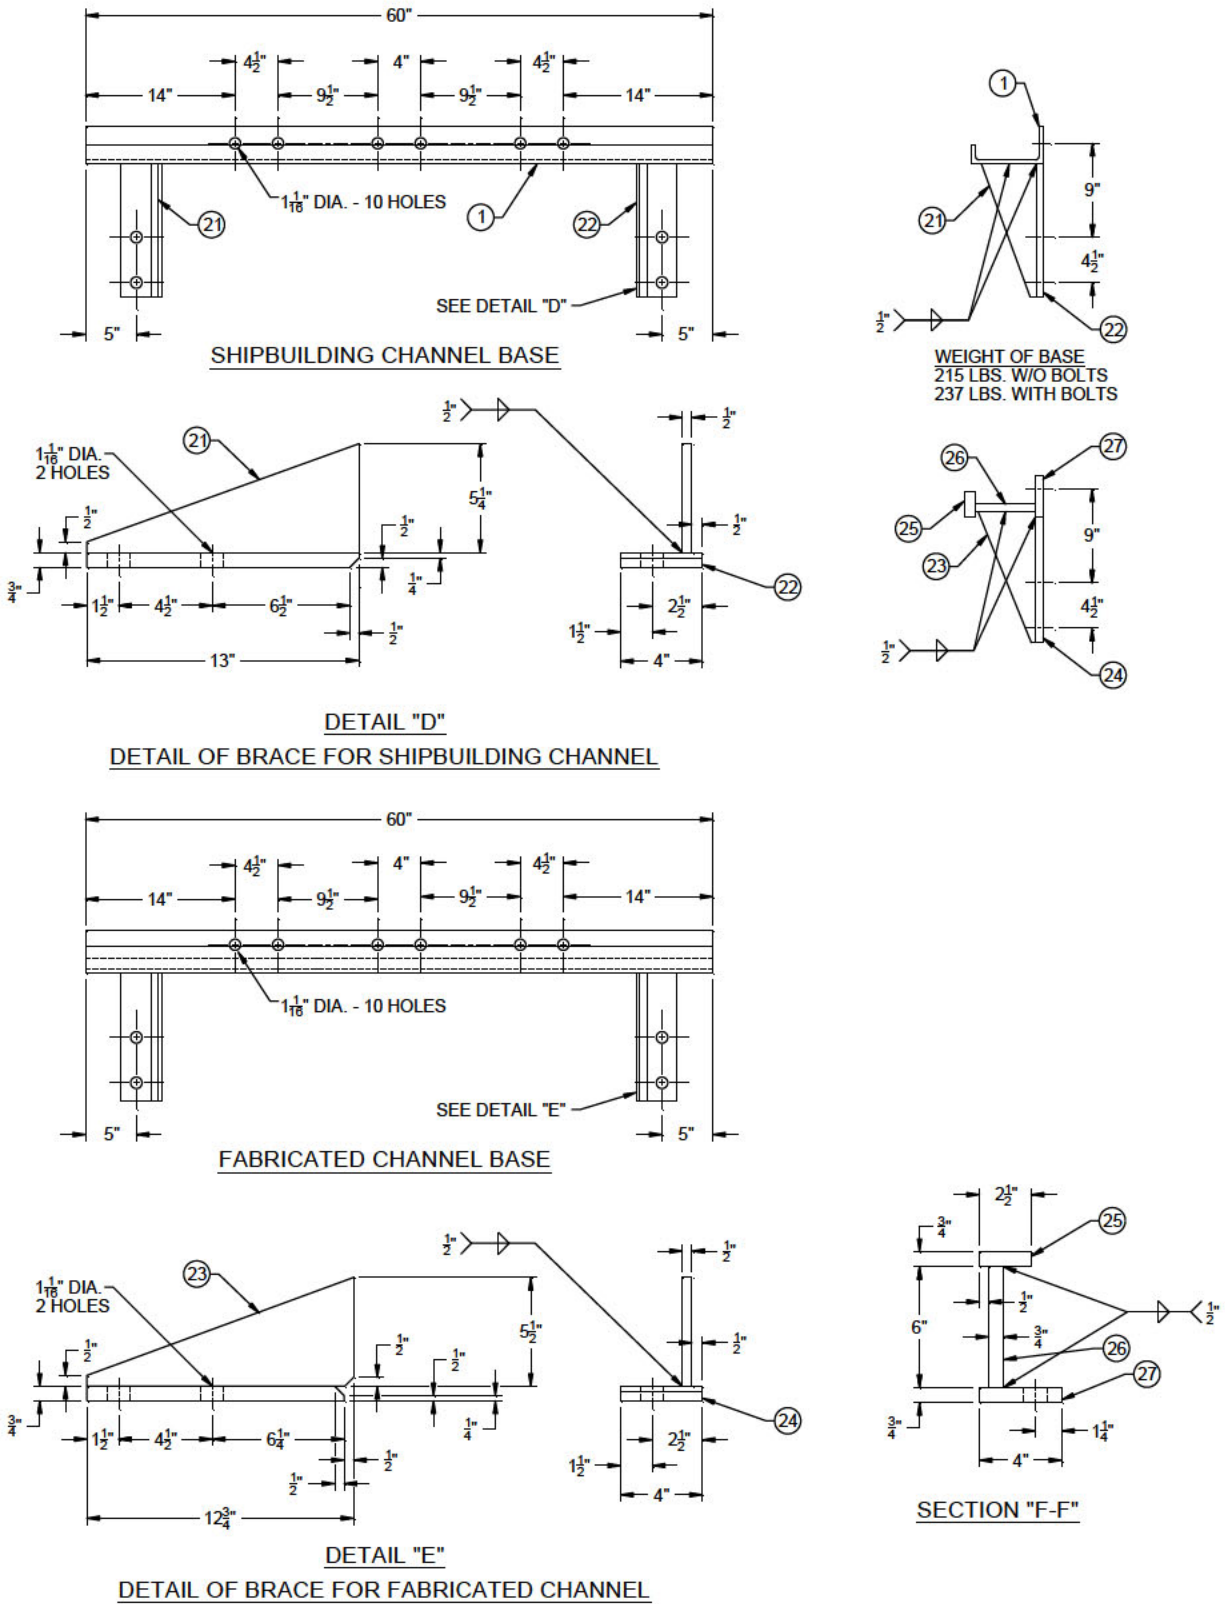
Section details of standard mounting platform for testing equipment on the MWSM. (Sheet 2 of 3)
